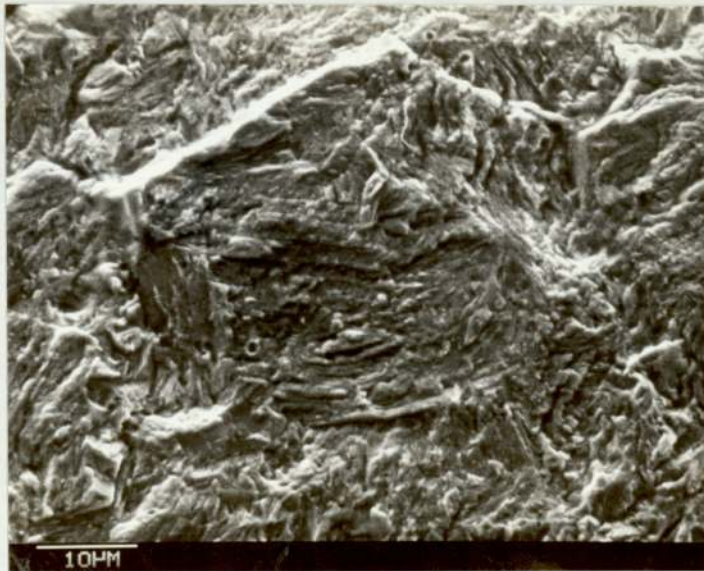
Fatigue fracture in carbonitrided case at the notch root, case depth 0.38 mm, root radius 0.76 mm,  $N_i = 363,240$
